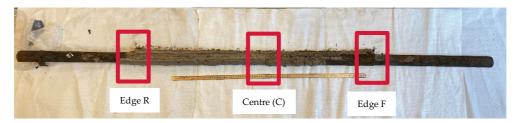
One of the cladded tubes corresponding to the project FECRALCLAD (exposure #4), exposed for 6 months in the boiler Händelö P14. The middle zone of each tube was cladded with the candidate materials by mechanized gas metal arc welding. After exposure, cross sections of three areas of the cladded section of the tubes were carefully removed for examination. The edge "R" corresponds to the end of the tube oriented towards the rear-wall of the boiler, while the edge "F" is towards the front-wall.
